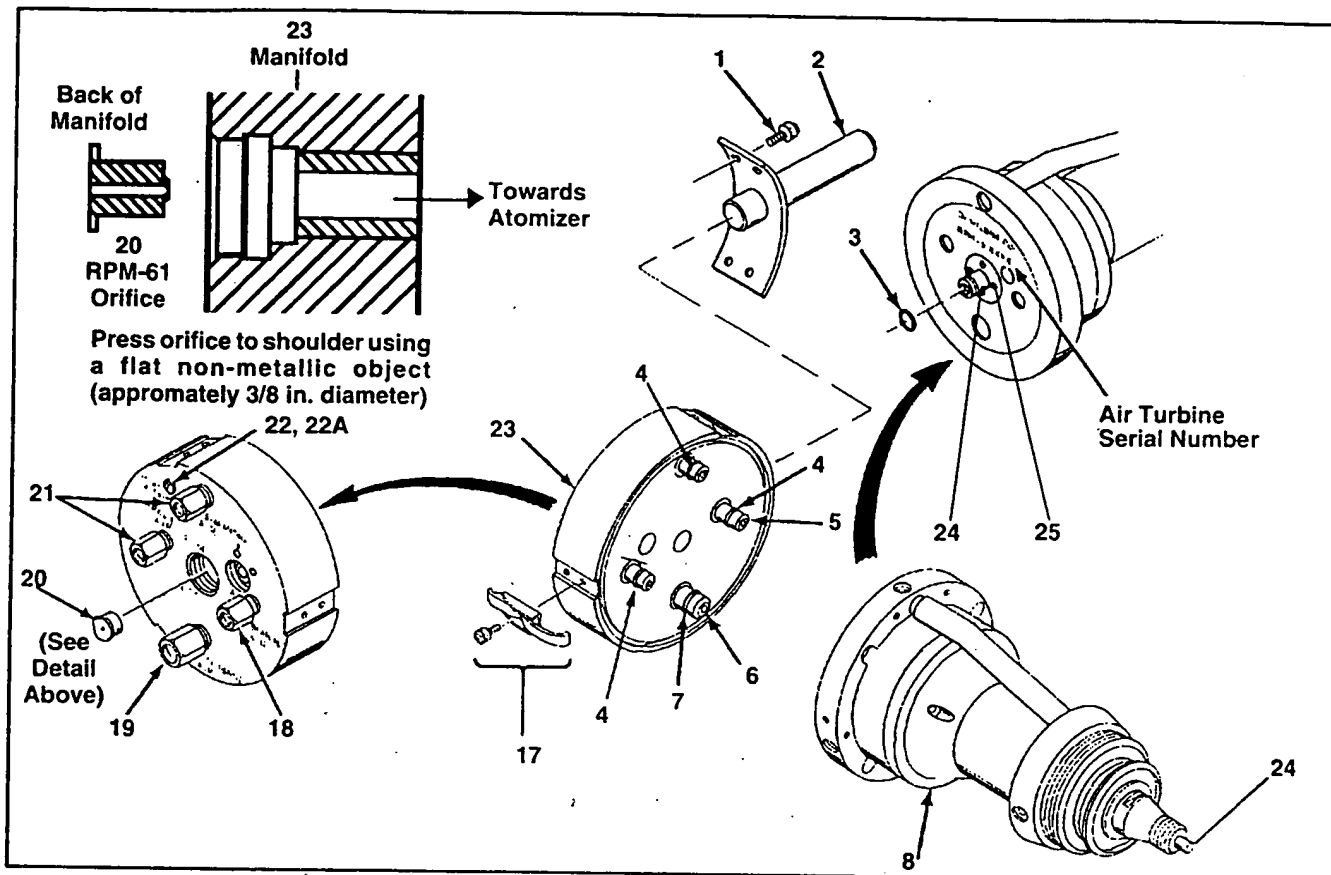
a Exploded View — Quick Change Rotary Atomizer
